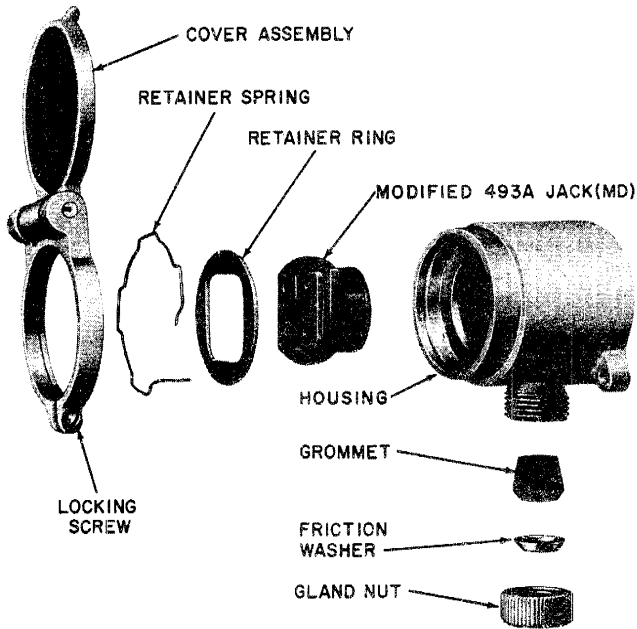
Assembly of KS-16151, List 1 Jack (MD)
